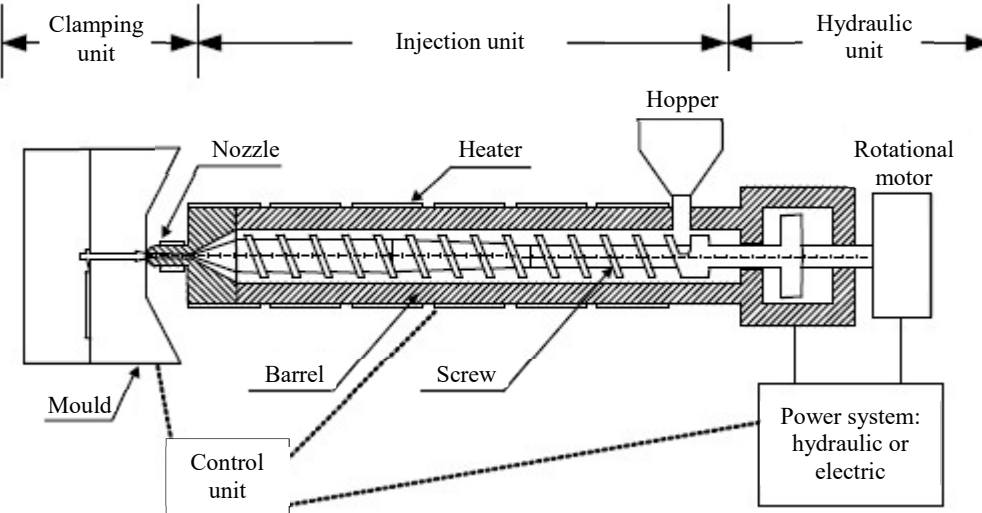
Simplified schematic of a reciprocating-screw injection molding machine. Adapted from [83]
